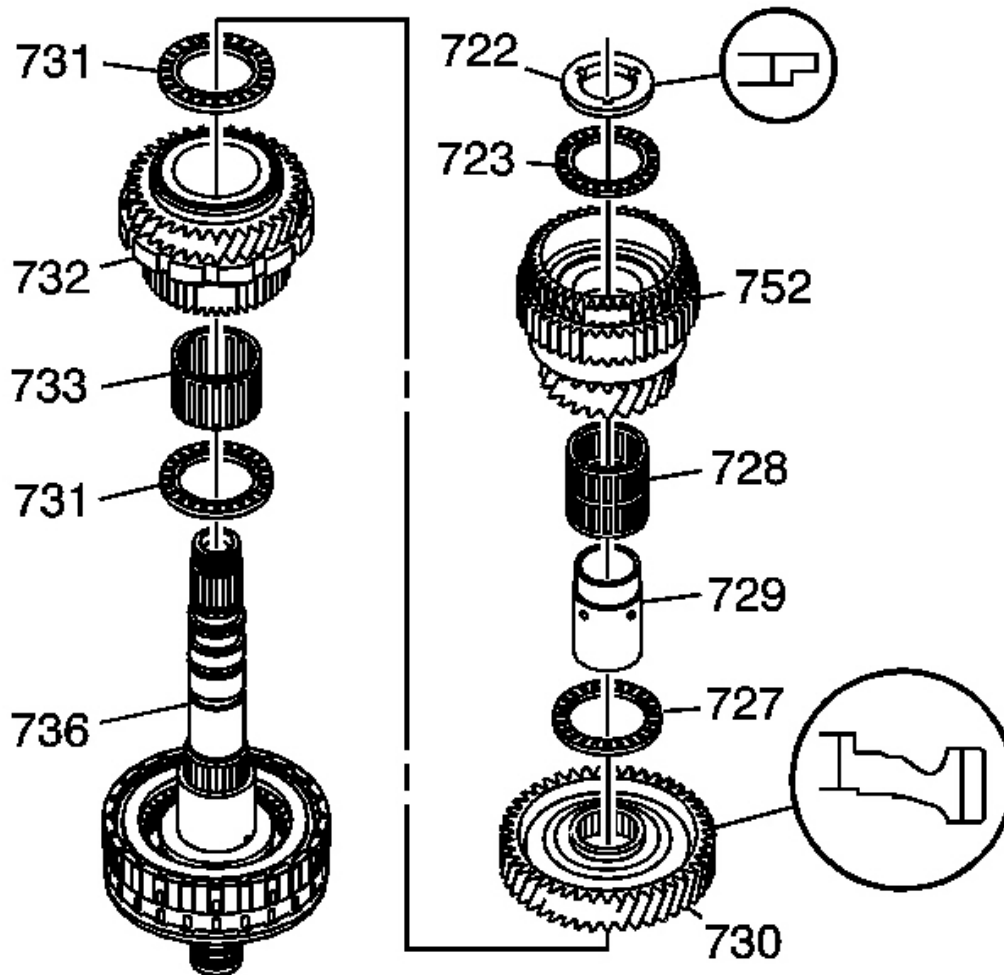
1st/2nd Clutch Shaft & Components Removed
